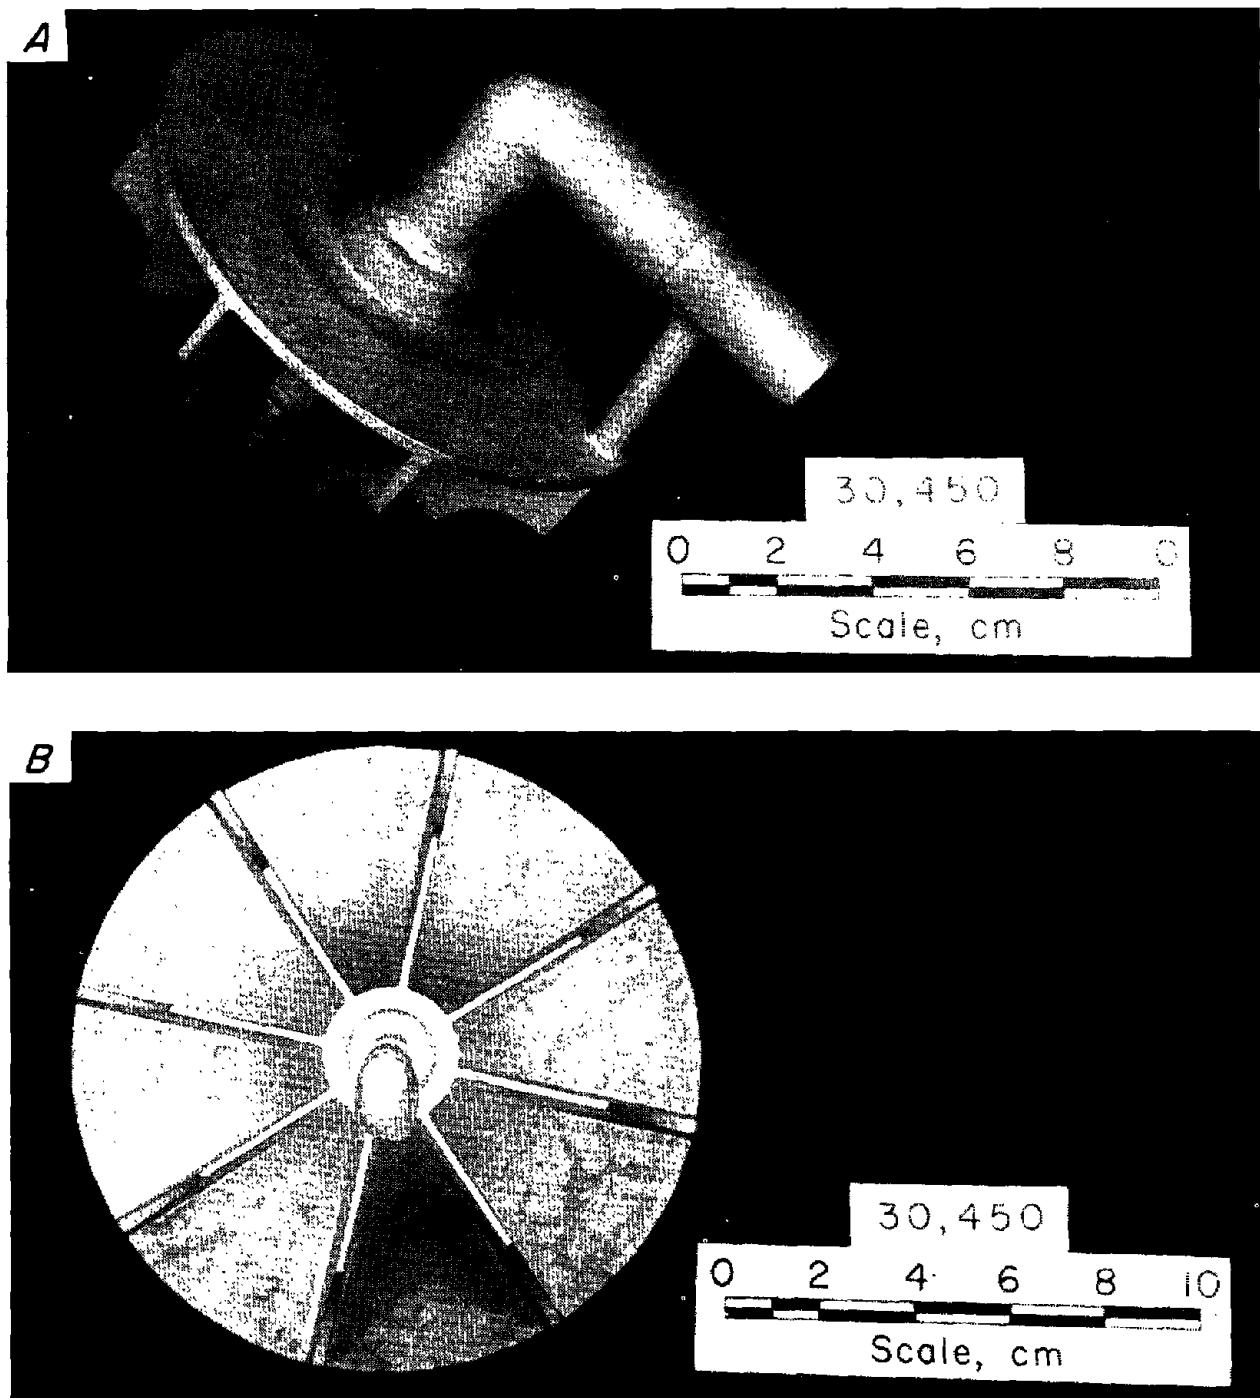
Profile (A) and bottom (B) views of turbine wheel-blade centrifugally cast using a bottom-fed horn gate system.
